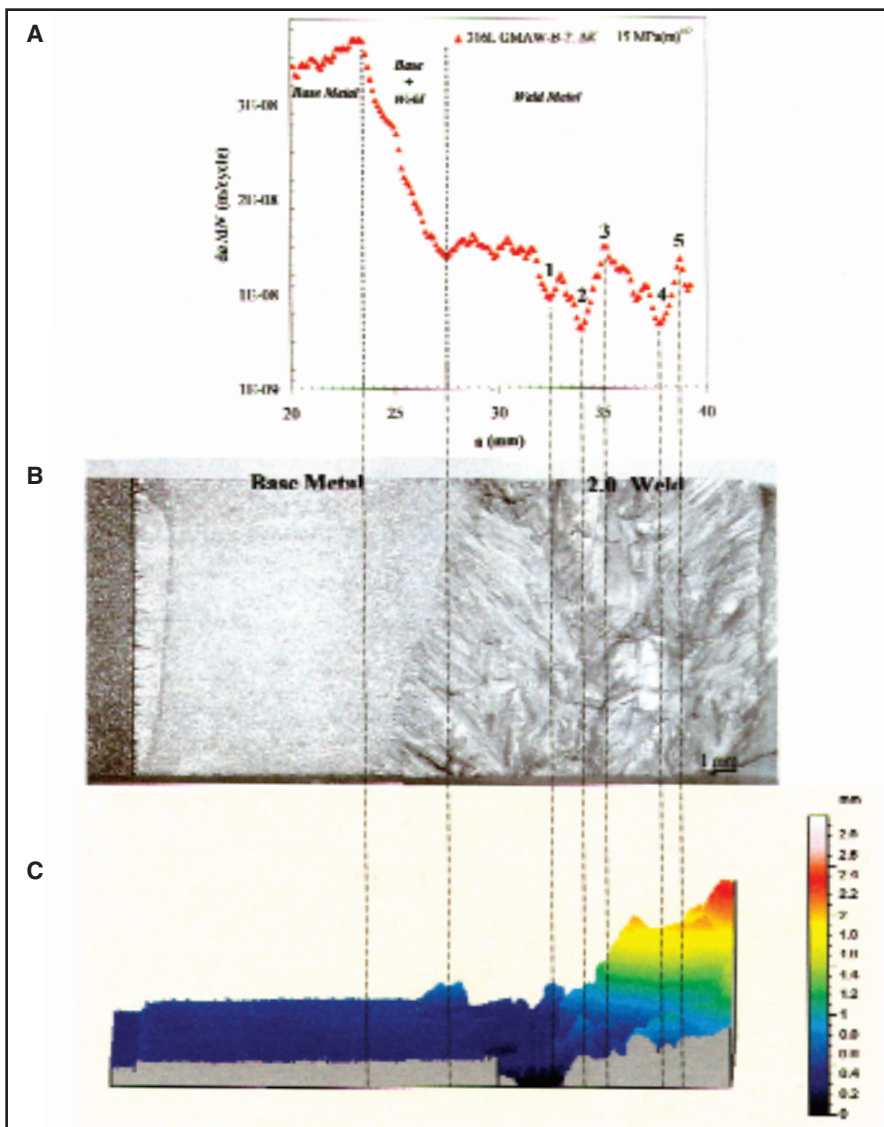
Fatigue results from 316L GMA weld constant ΔK test. A — Fatigue results; B — fracture surface; C — surface profile.
